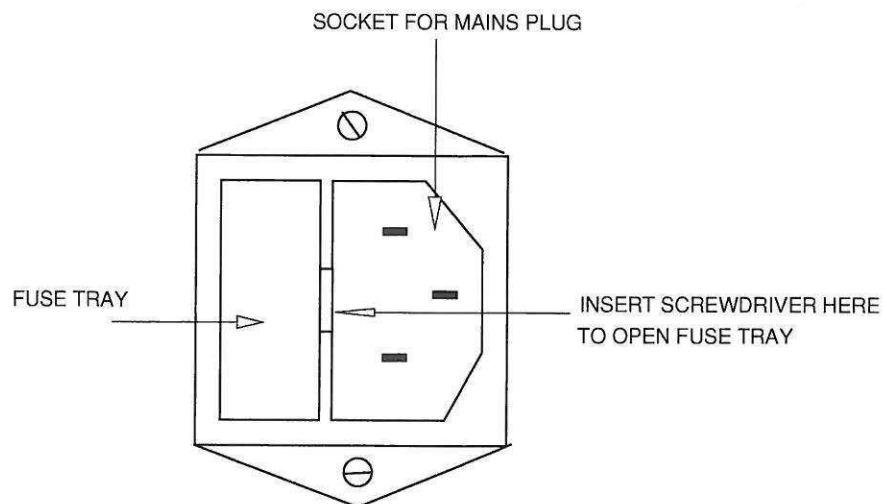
Power Connector Assembly - Fuse Tray Closed
